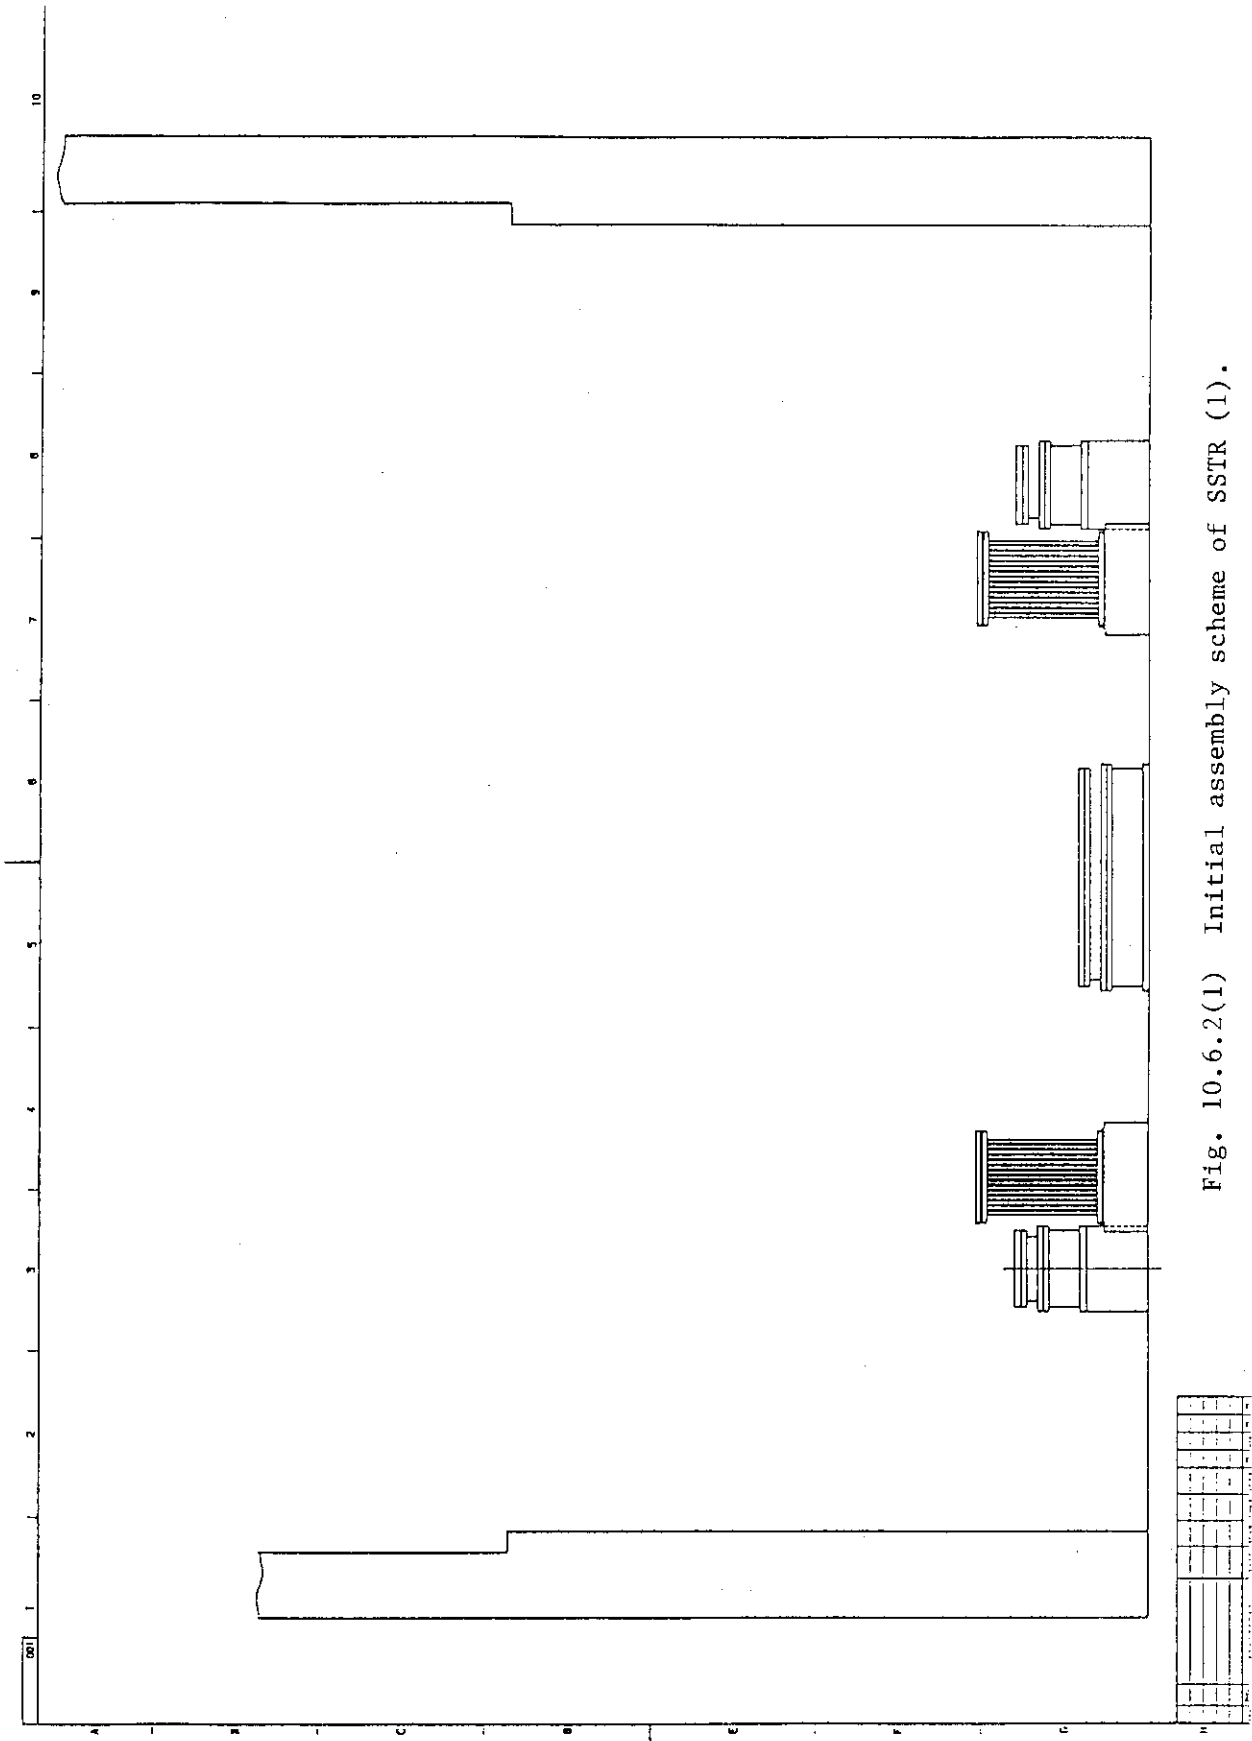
(1) Initial assembly scheme of SSIR (1).
